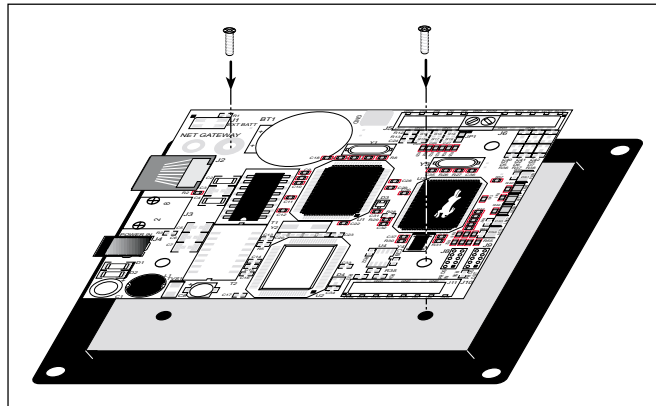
Attach RabbitLink Board to Plastic Enclosure Base
